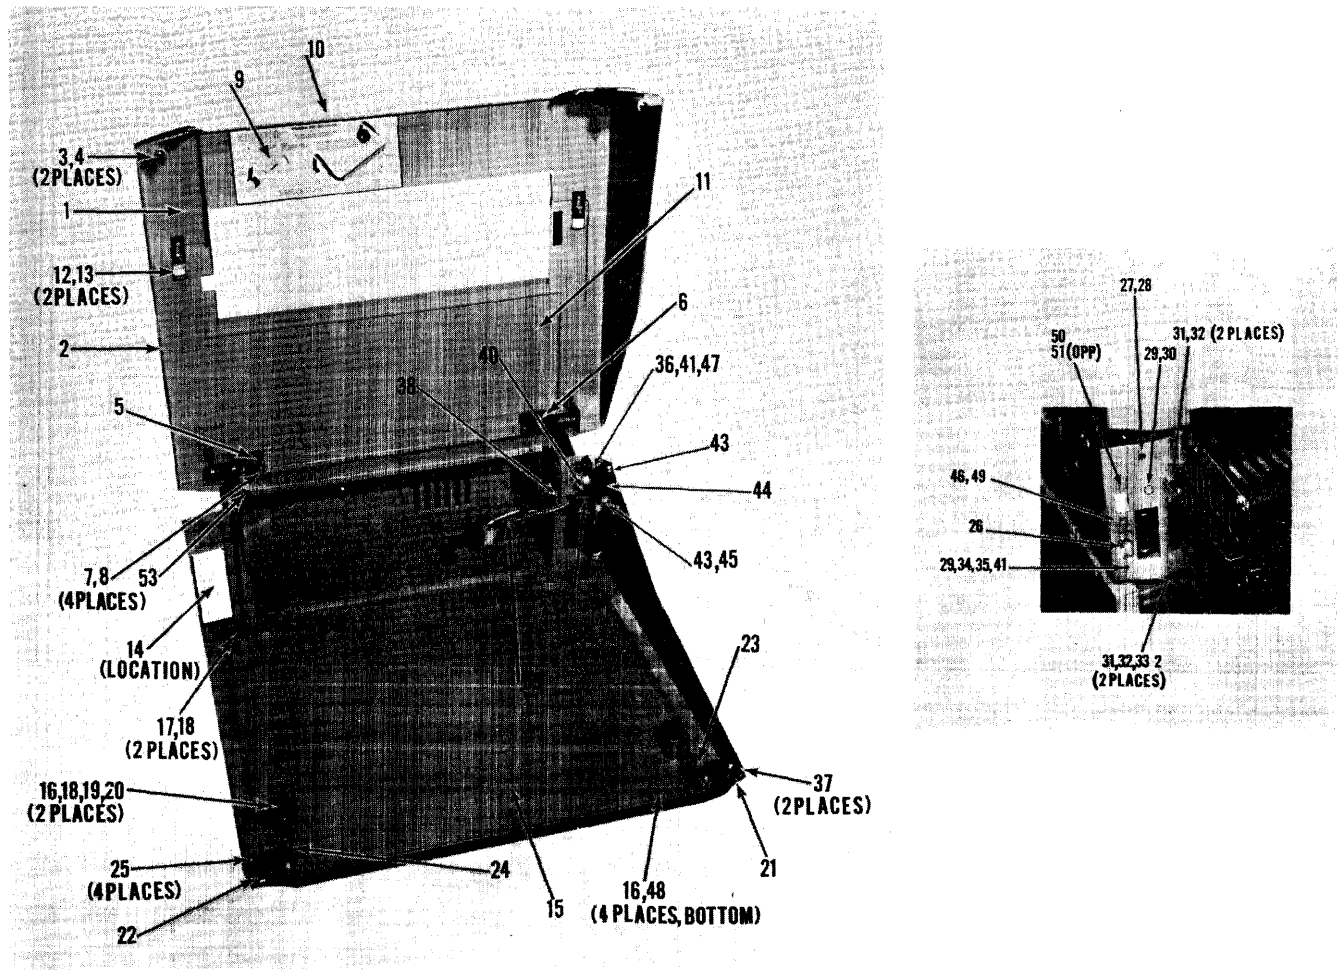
Top-Bottom Cover Assembly, TermiNet 300 D Printer
